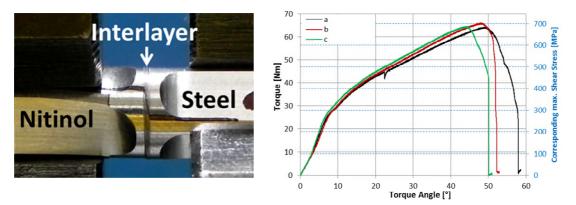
Experimental Setup of a Torsion Test on a Weld Specimen (left) and Torque Diagrams of 3 Torsion Tests (right)
